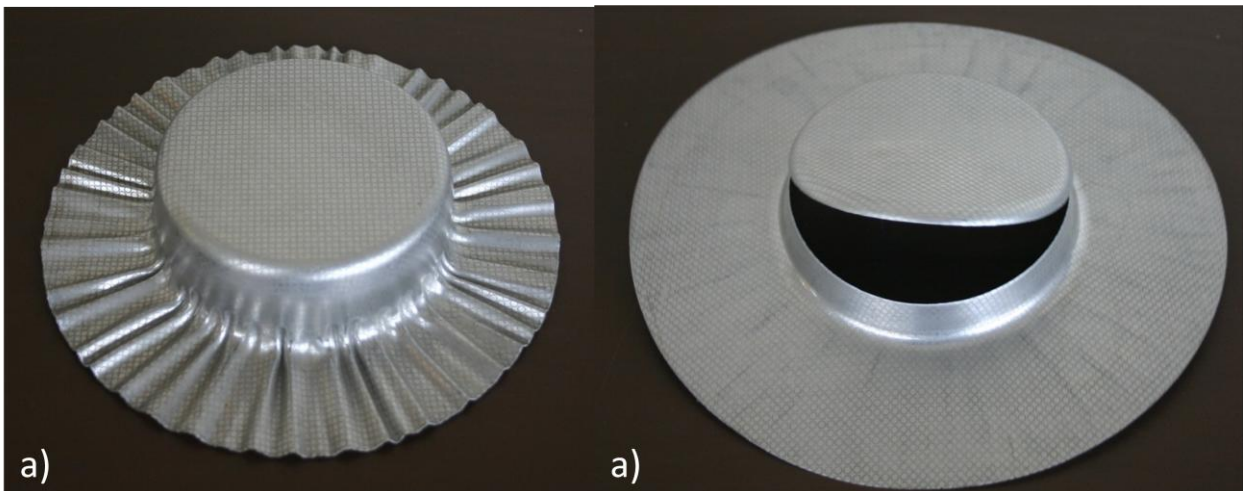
Results from deep drawing 228.6 mm (9") blanks at 150°C. Wrinkles occurred at below 6.7 kN BHF (a) and fracture at the punch radius occurred above 6.7 kN BHF (b).
